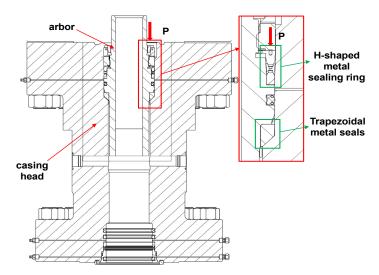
Conventional Shaft Core Type Casing Hanger and Seal Structure.
